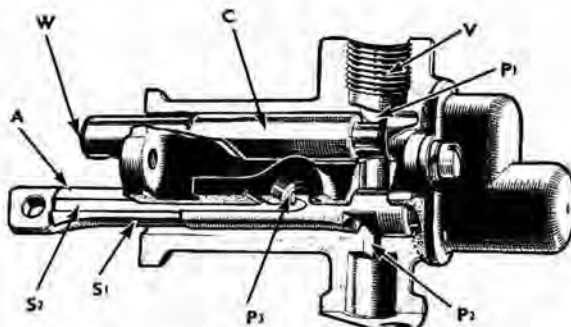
The constructional details of the cut-off valve are here clearly shown.
